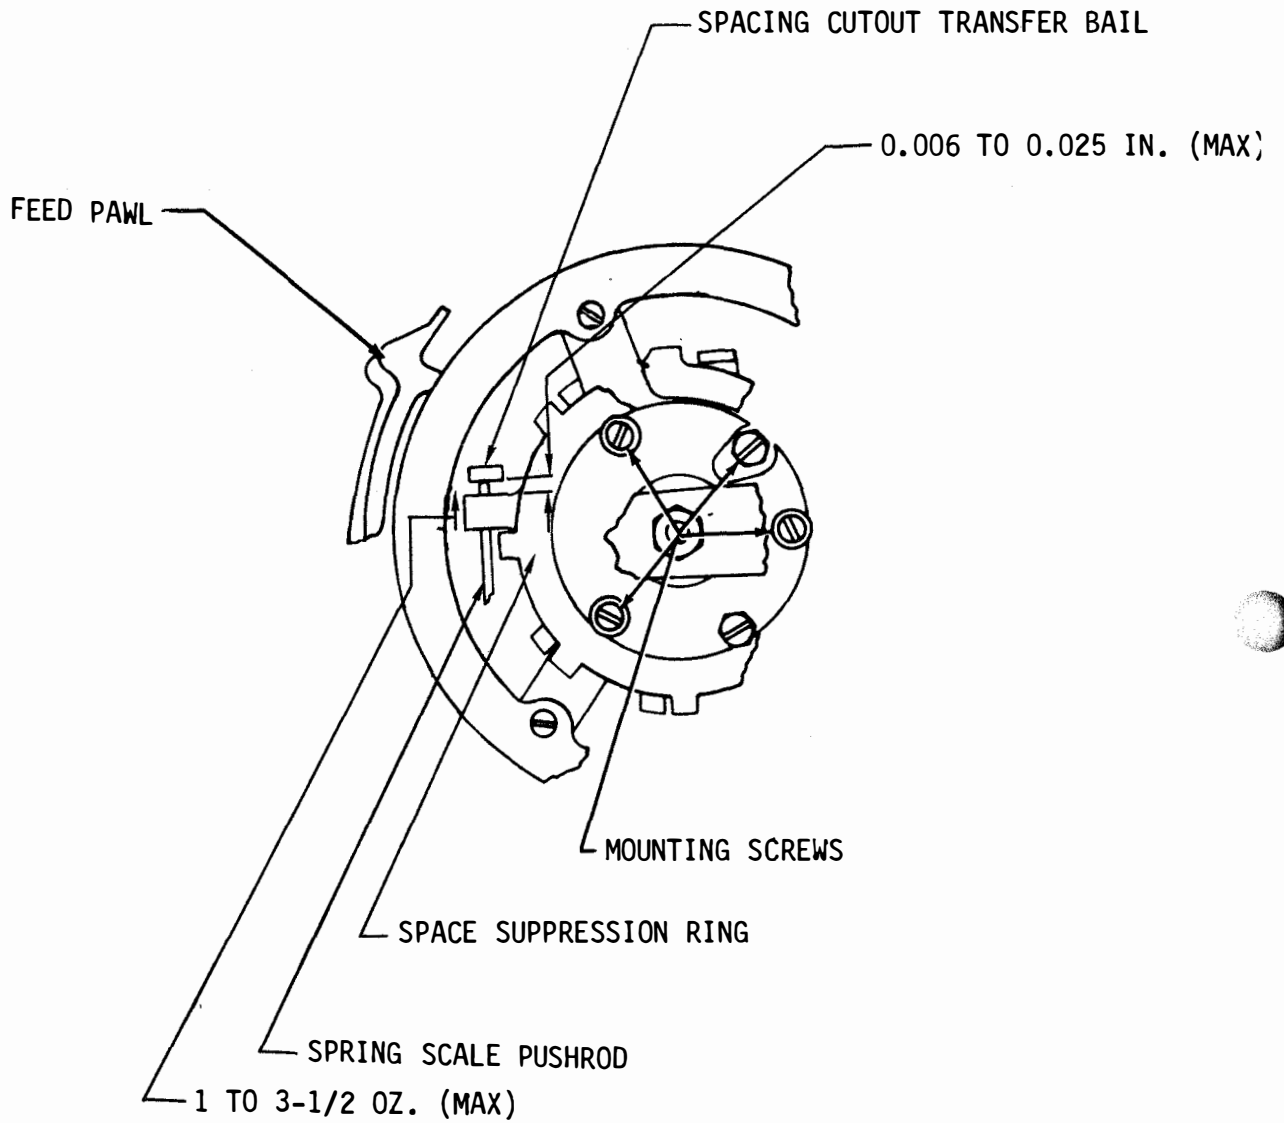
Right Margin and Spacing Cutout Transfer Bail Spring, Front View
